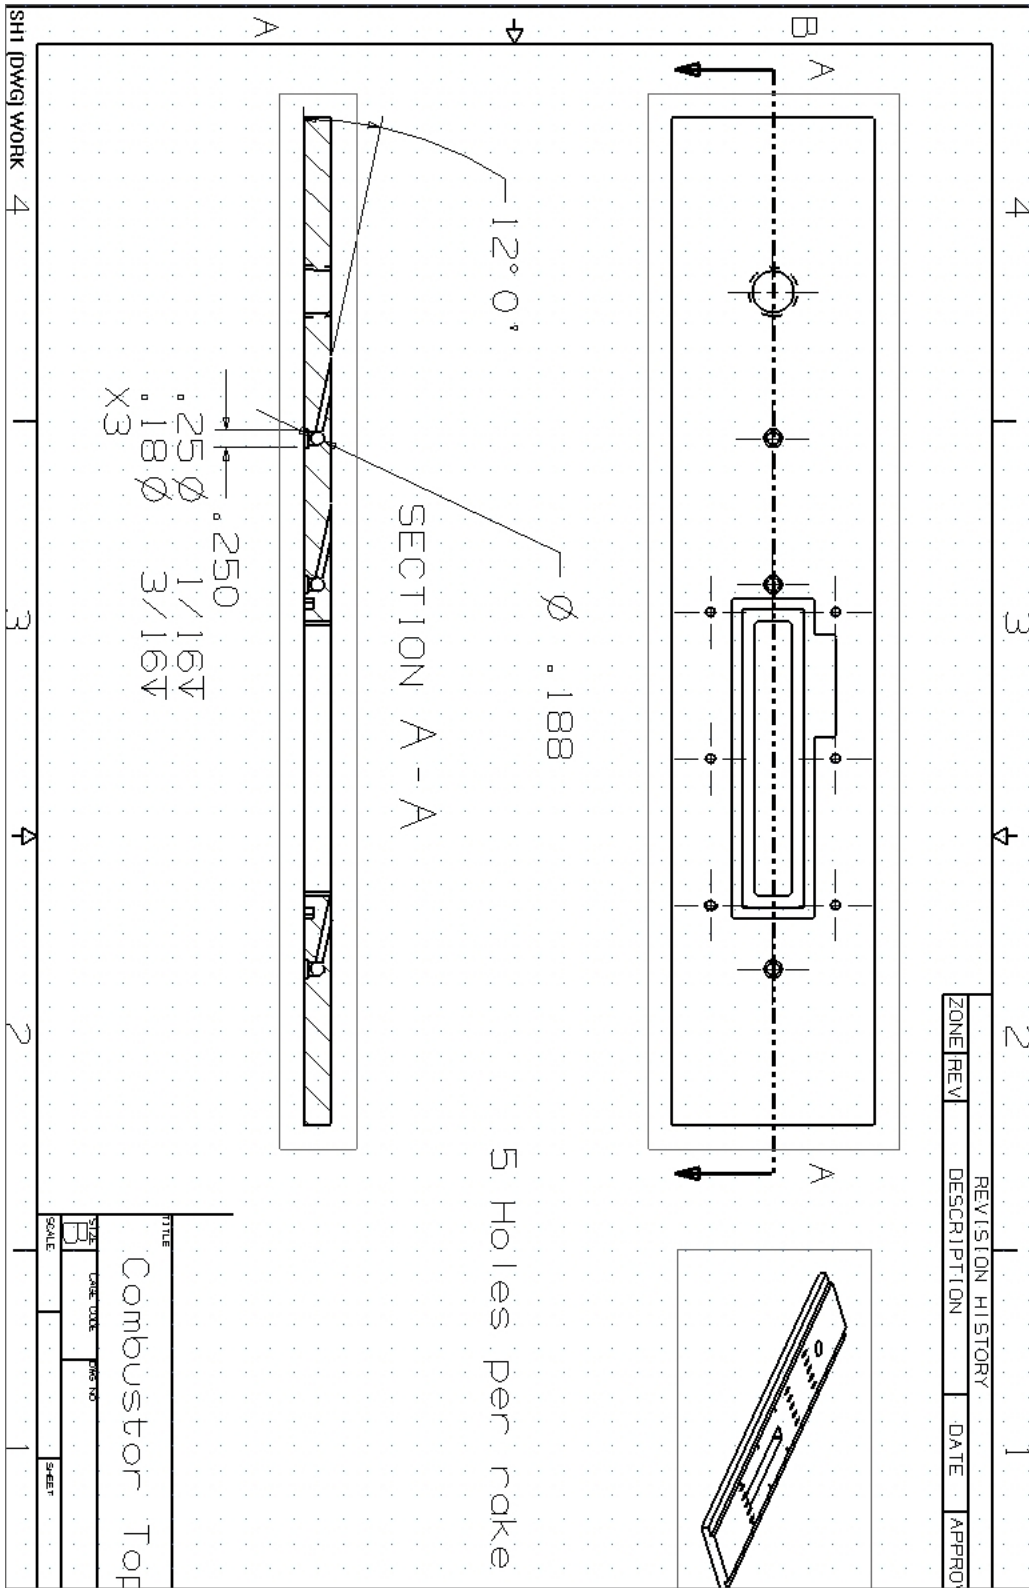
Engineering Drawing of the top of the Sector Combustor
